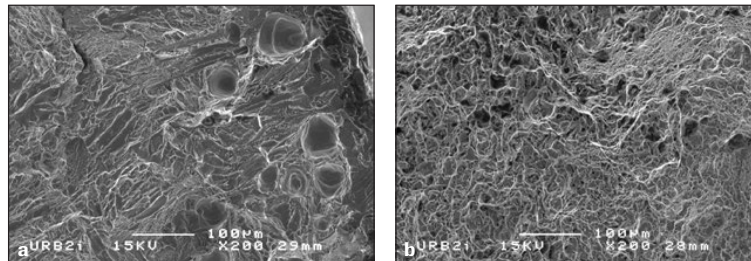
Scanning electron microscopy (SEM) images of fractured surfaces of the (a) selective laser melting (SLM) specimens and (b) milled specimens.
